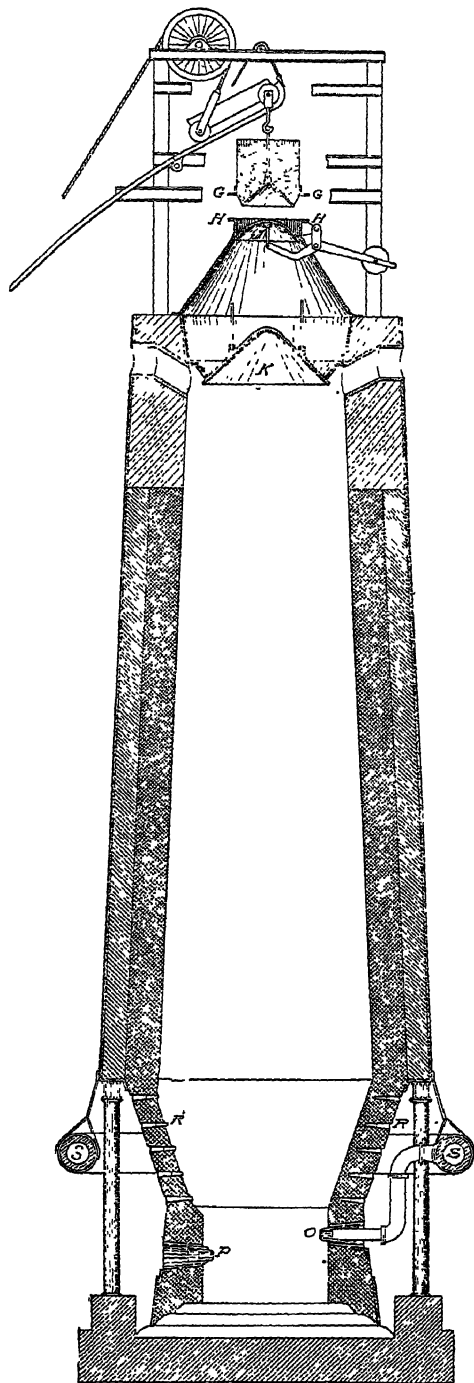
Section of one of the Duquesne blast-furnaces. GG, flanges on the ore bucket; HH, fixed flanges on the top of the furnace; J, counter-weighted false bell; K, main bell; O, tuyere; P, cinder notch; R, V, water-cooled boxes; S, blast pipe.
